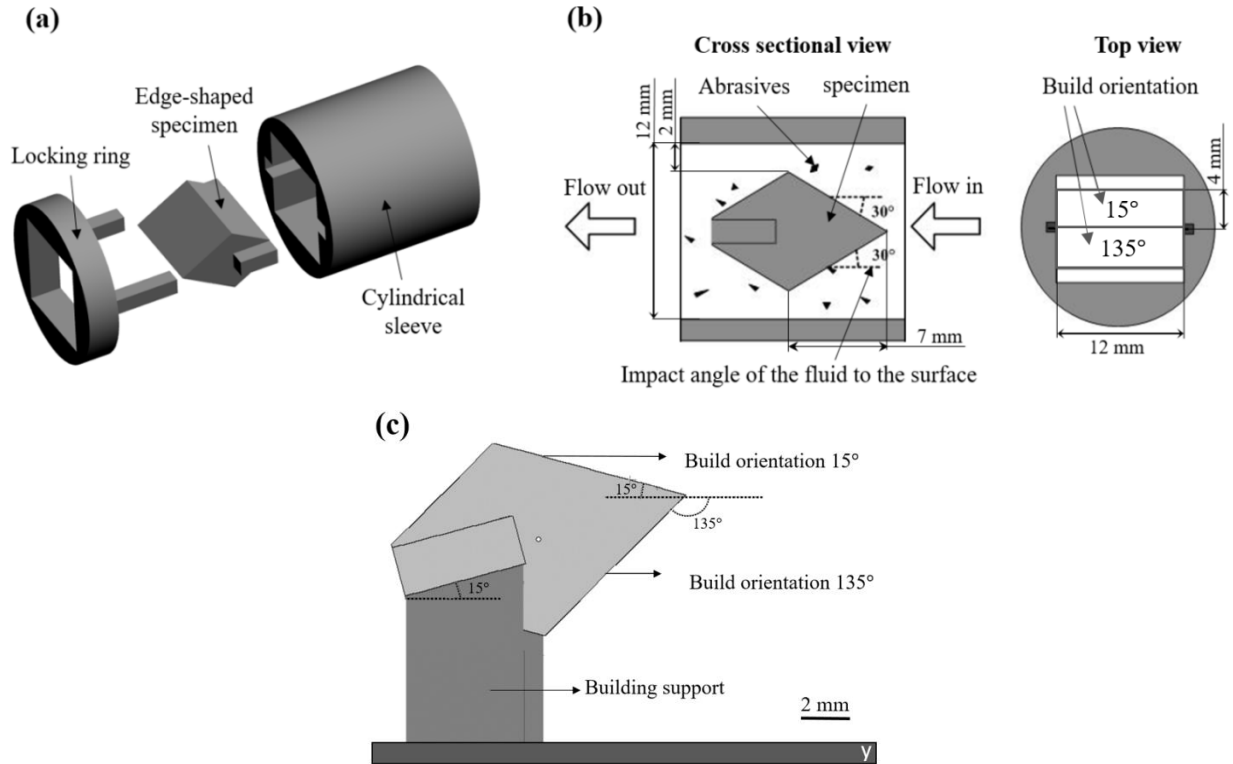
(a) Polishing specimen assembly, (b) chemical abrasive fluid flow inside the polished specimen, (c) edge shape specimen on the SLM building platform
